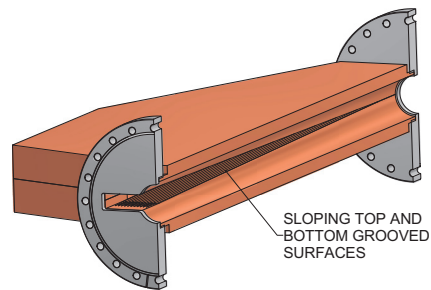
ILC DR Wiggler Section Photon Stop section showing sloping and grooved photon-absorbing walls.
